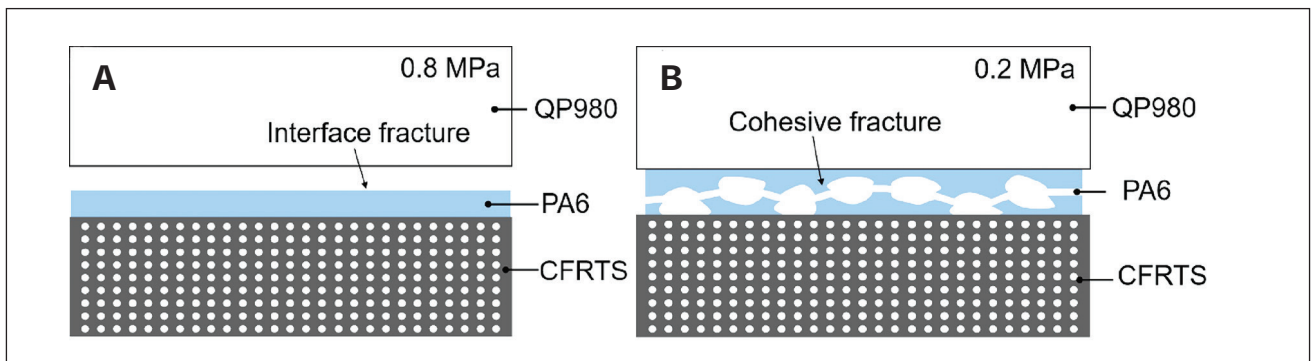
Fracture mode of joints under 0.8 (A) and 0.2 (B) MPa pressure.
